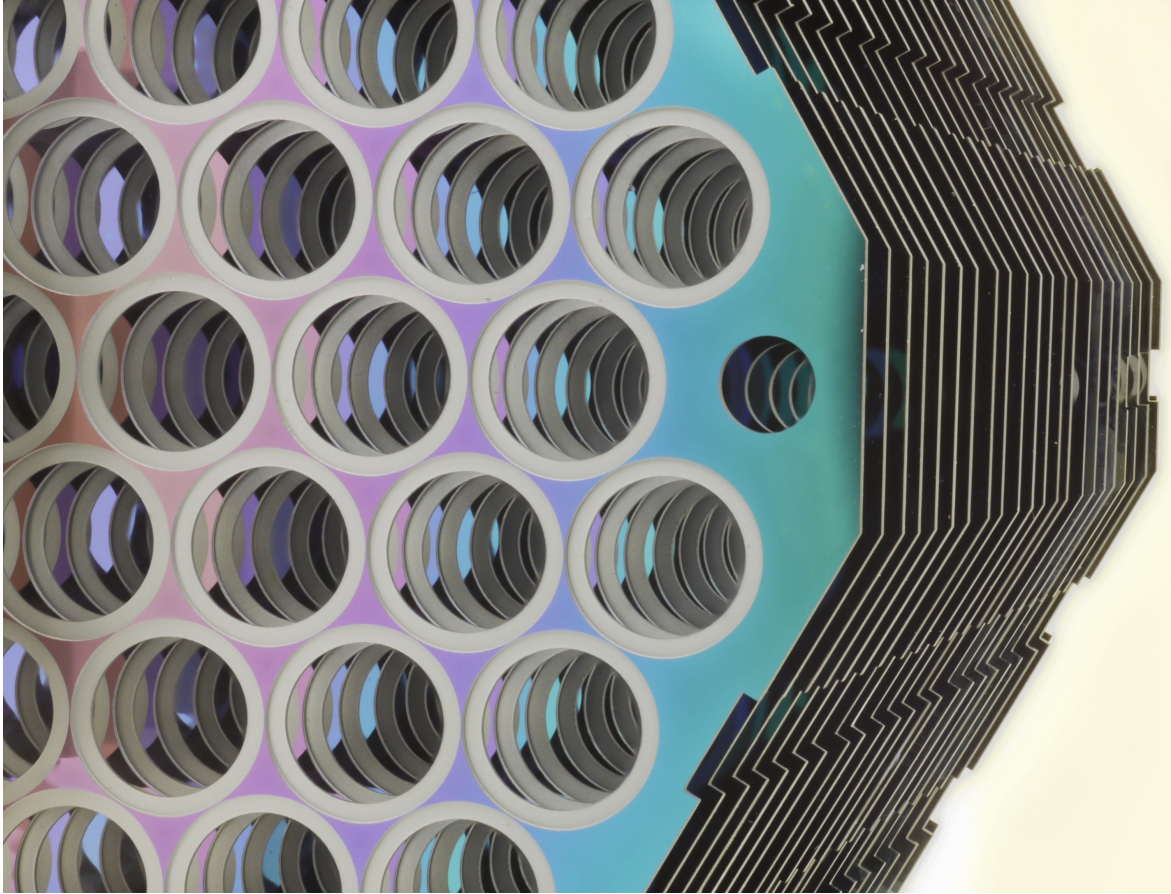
Perspective view of 23 of the 33 Si platelets that will be stacked and metallized to form a 50 mm diameter array with 84 horns. This planar array of corrugated platelet feeds will be integrated with a matching arrays of NIST fabricated OMT-coupled TES polarimeters fabricated on Si and $\lambda/4$ Au-coated Si backshorts.
